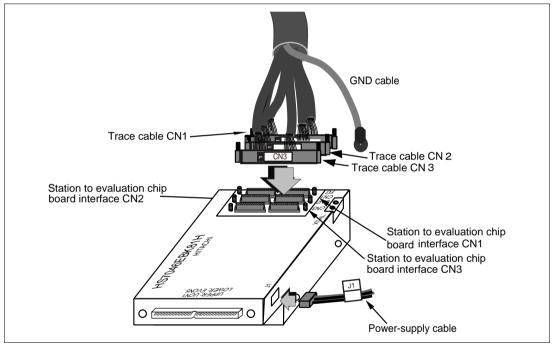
Connecting Trace Cables to the Evaluation Chip Board
